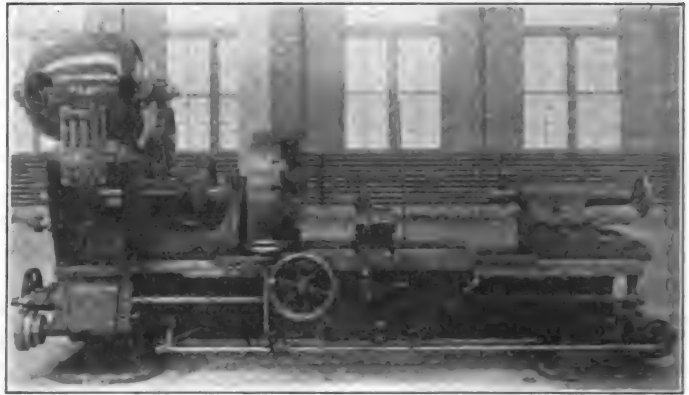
MOTOR-DRIVEN ENGINE LATHE.
